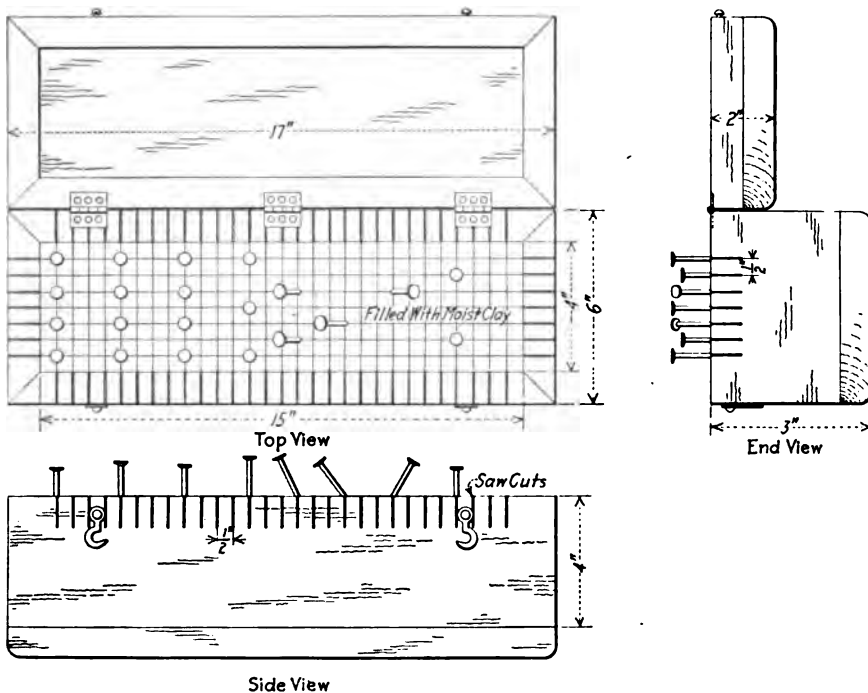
CLAY-FILLED BOX WITH NAILS, SHOWING POSITION OF DRILL HOLES.
